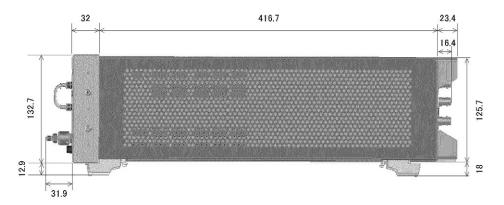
Dimensions (side view, in millimeters, nominal)
